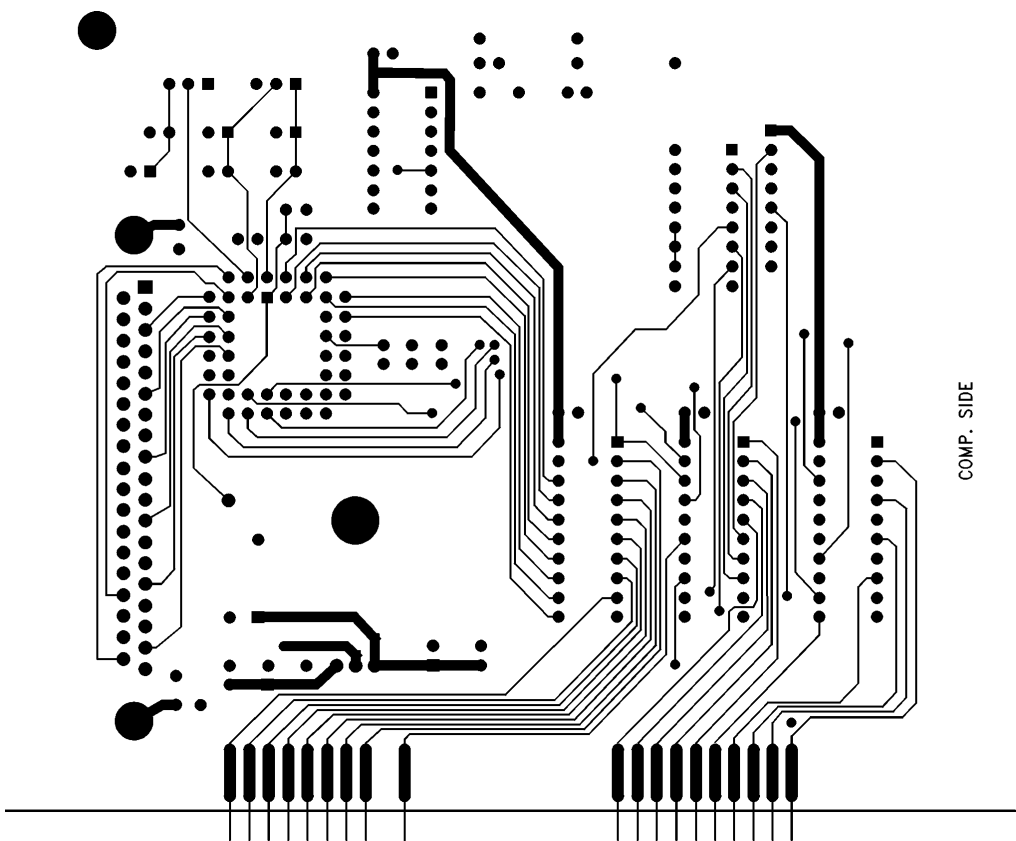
LM12(H)454/8 Evaluation/Interface Board Component-Side Layout Positive
